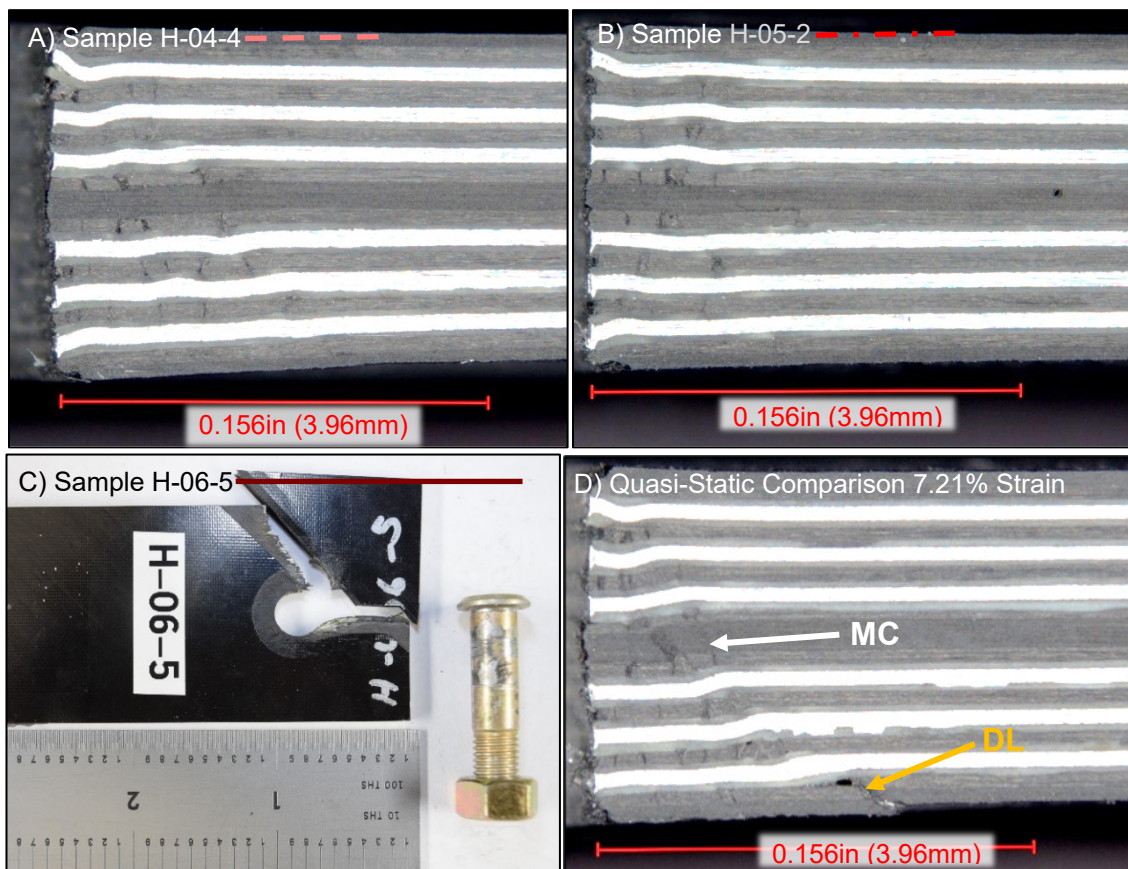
Control Double Shear Fatigue Step Test Sectioned Samples
